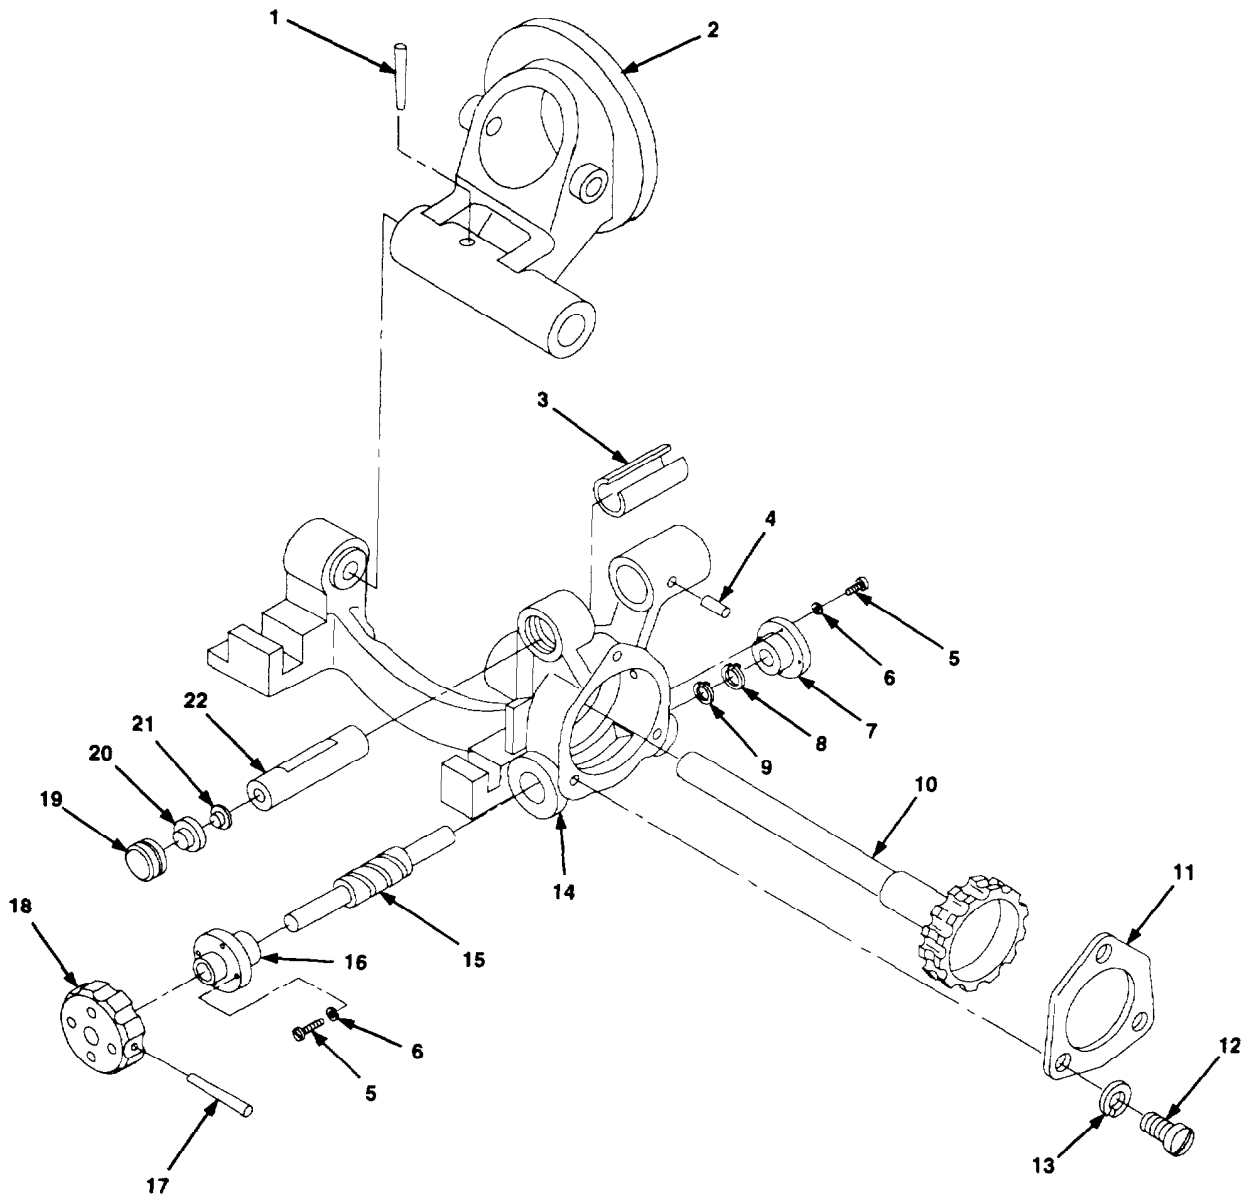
Quadrant Support Assembly 8267714-1 and 8267714-2 - Continued
